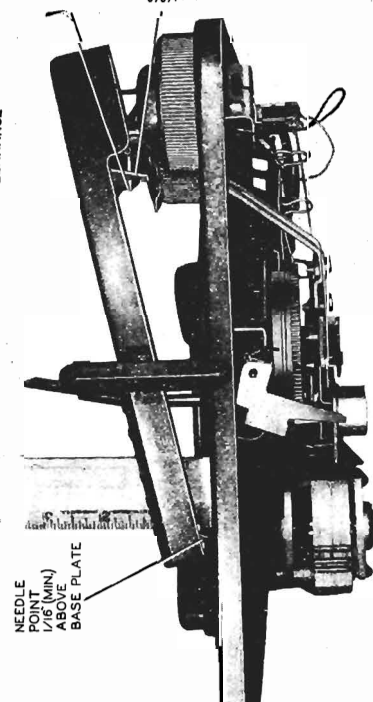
BASE PLATE CLEARANCE ADJUST-
